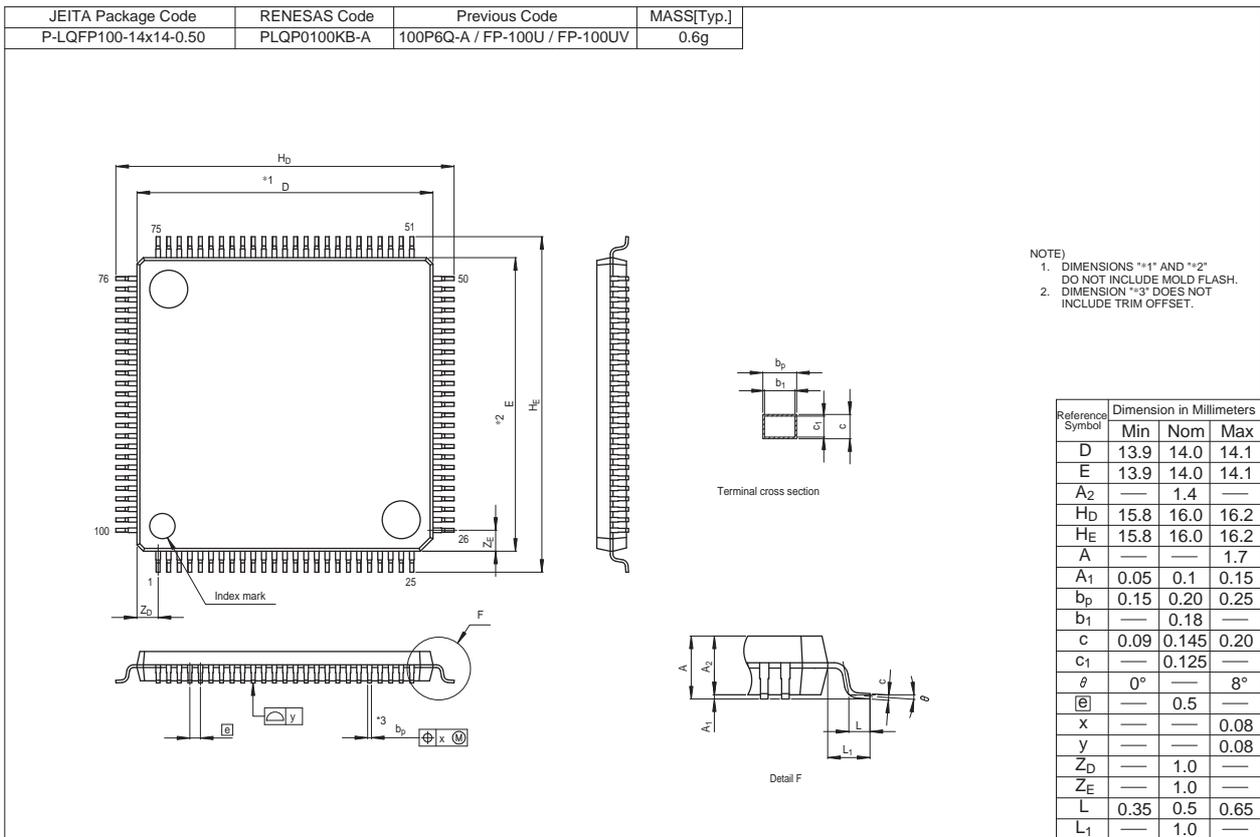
Pin LQFP (PLQP0100KB-A) Package Dimensions
